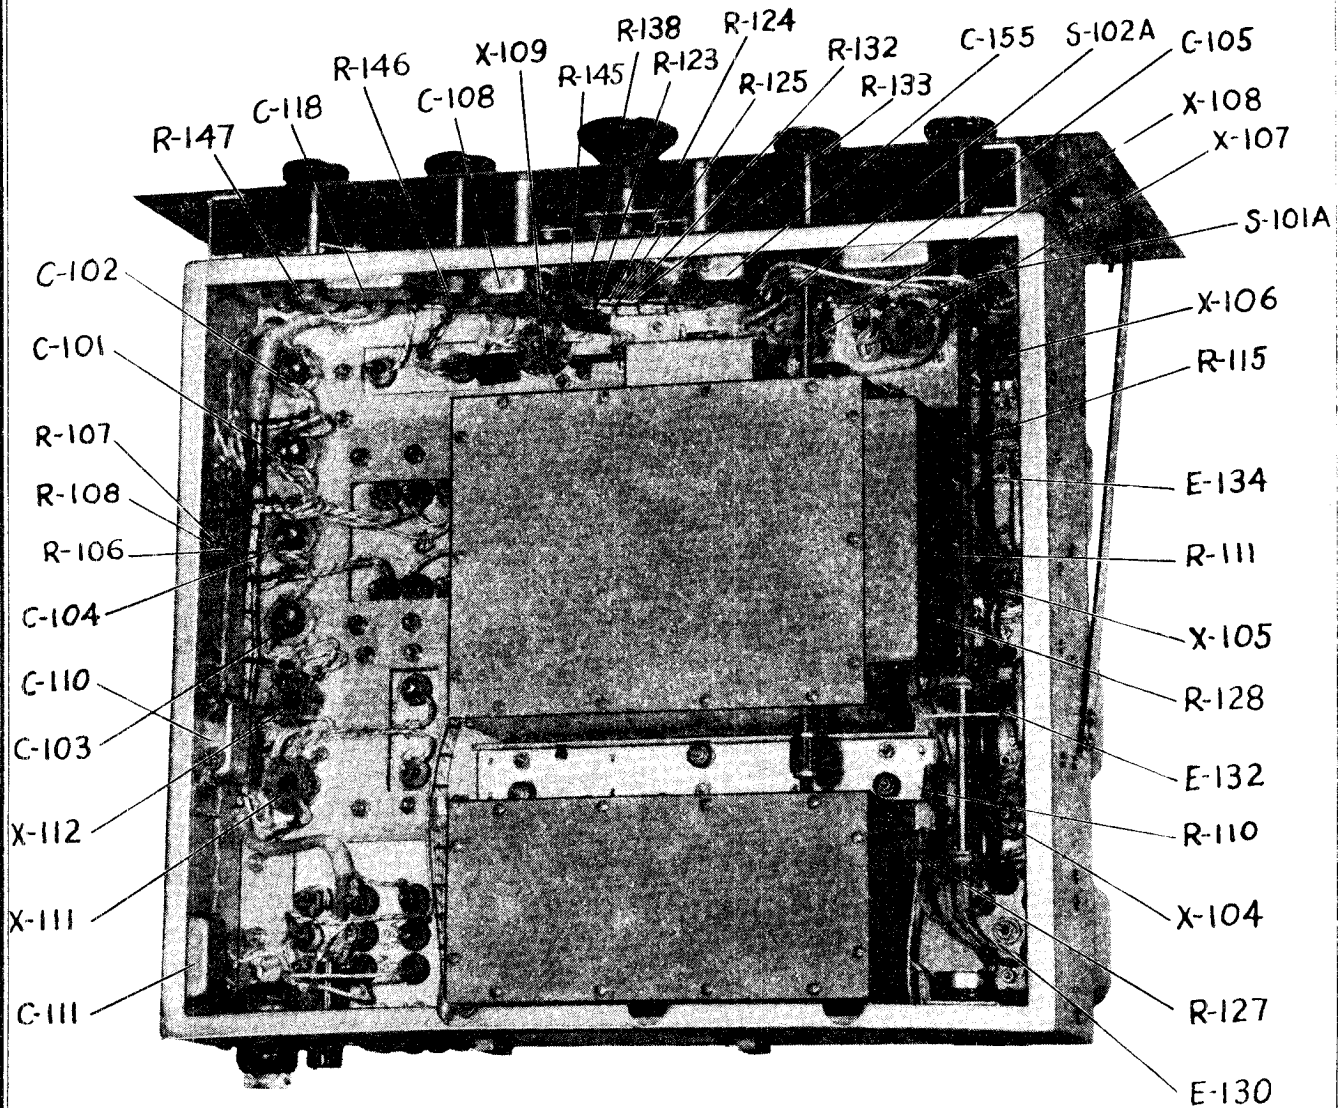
RIGHT BOTTOM OBLIQUE VIEW, RADIO RECEIVER CHASSIS. BOTTOM COVER PLATE REMOVED.
